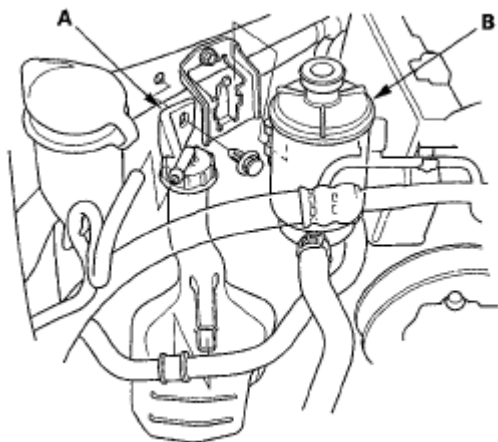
Identifying Coolant Reservoir And Power Steering Fluid Reservoir
